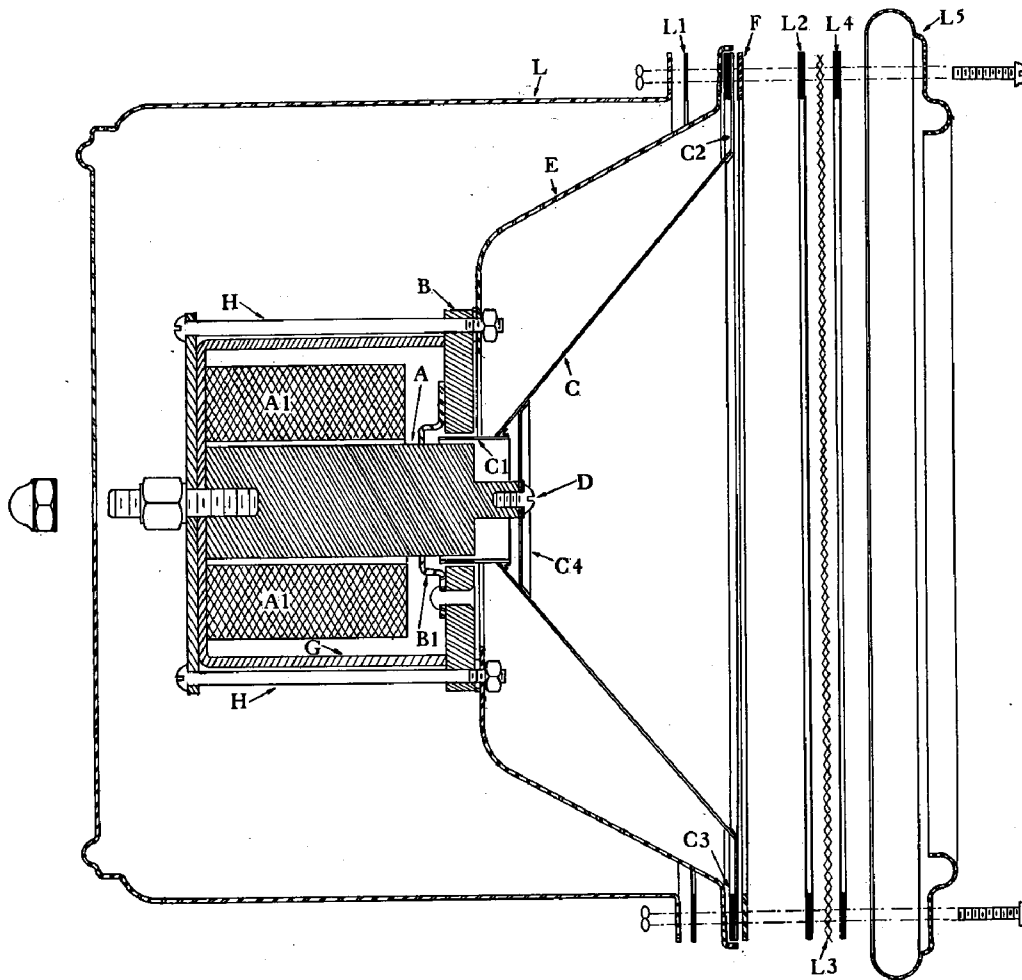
CROSS SECTION VIEW OF DIS-ASSEMBLED TYPE F DYNAMIC SPEAKER.
